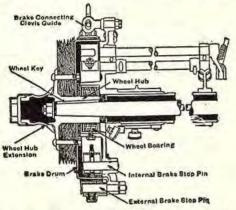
On the "FB" and "490" the outer bearing is on the wheel hub extension. On the later Superior model a heavyduty ball-bearing runs directly on the axle shaft and supports outer ends of axle shafts (see pages 15, 863, for classification of types of rear axles).
